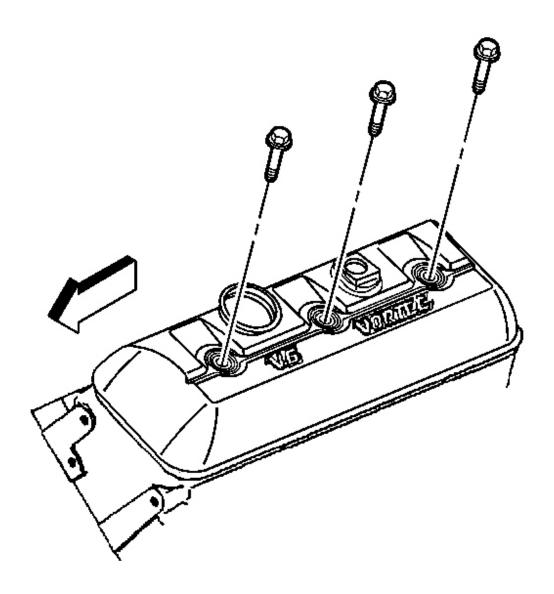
Valve Rocker Arm Cover Bolts (Left) Courtesy of GENERAL MOTORS CORP.
